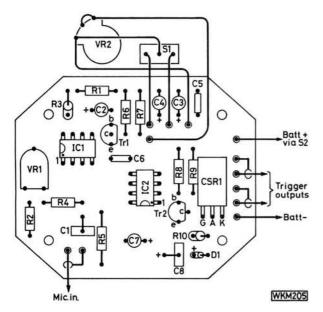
Component overlay on the p.c.b. CSR1 is fitted with its normal mounting surface facing away from the board
